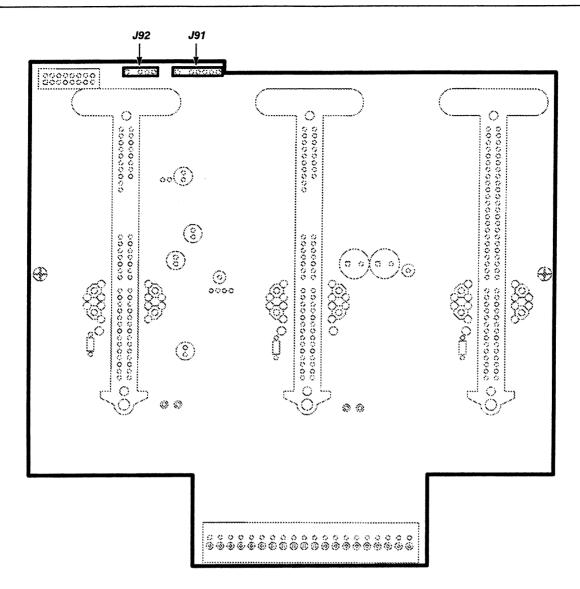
Removing/Replacing the A1 Plug-in Interface Board
